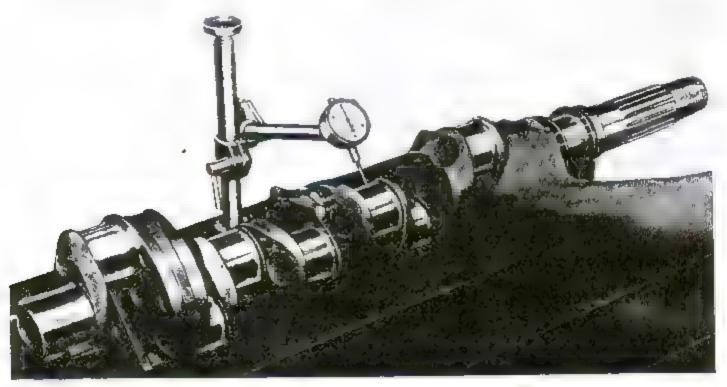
Inspecting Crankshaft Alignment
